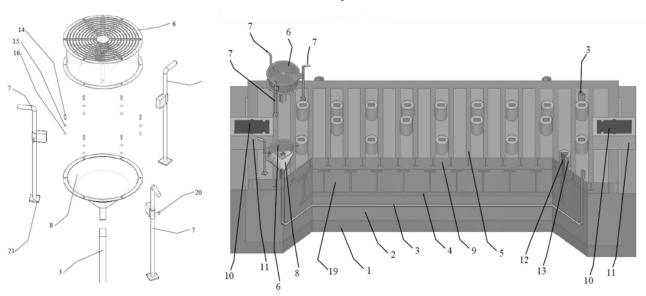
Sand mould cut in the casting pit using an optimised waste heat removal element (right), industrial fan connection system (left)
